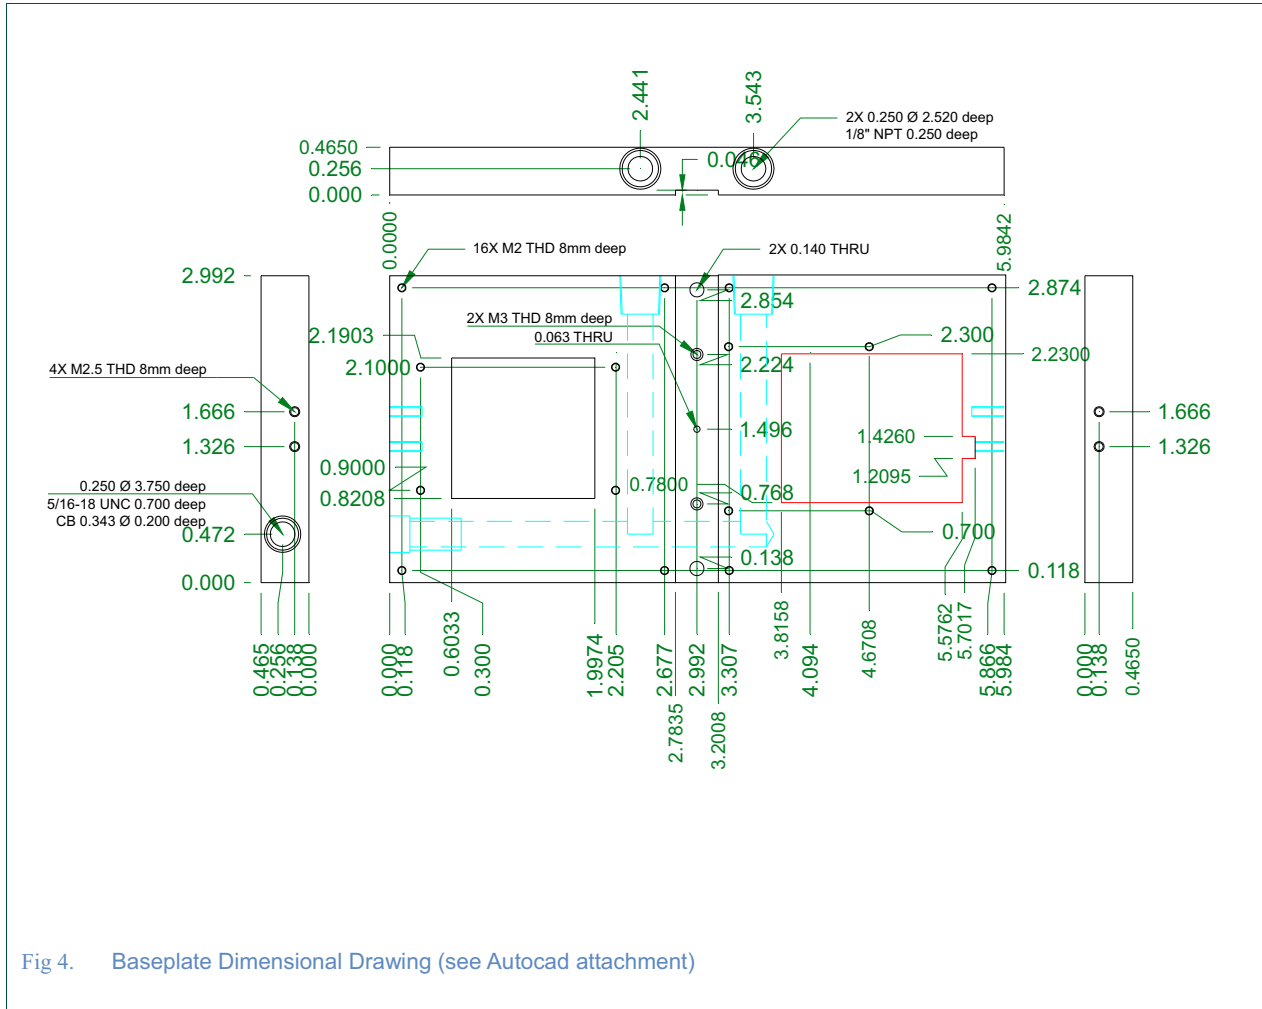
Baseplate Dimensional Drawing (see Autocad attachment)
